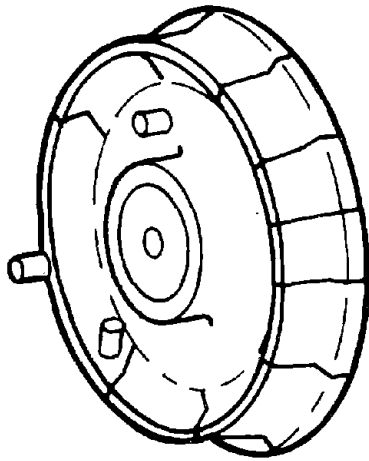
WHEEL ACCELEROMETER LOCATIONS.
